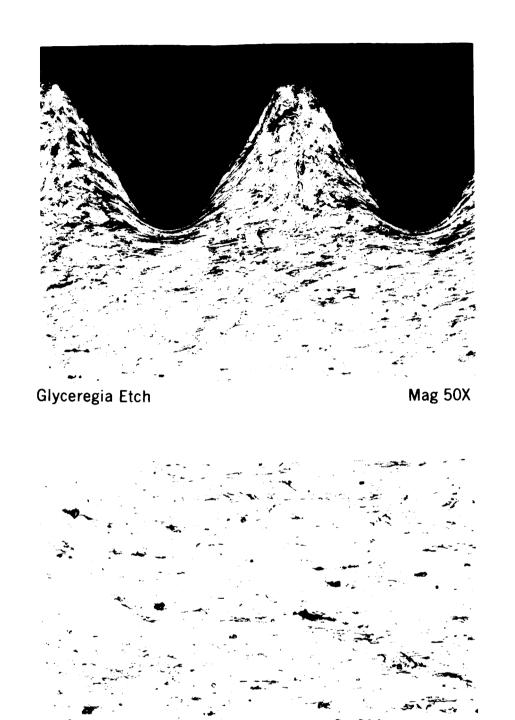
MICROSTRUCTURE OF CAMCAR A-286 BOLT THREADS AND BOLT SHANK
